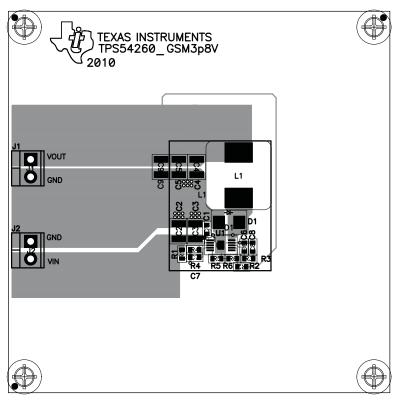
TPS54260_GSM3p8V Top-side Assembly
